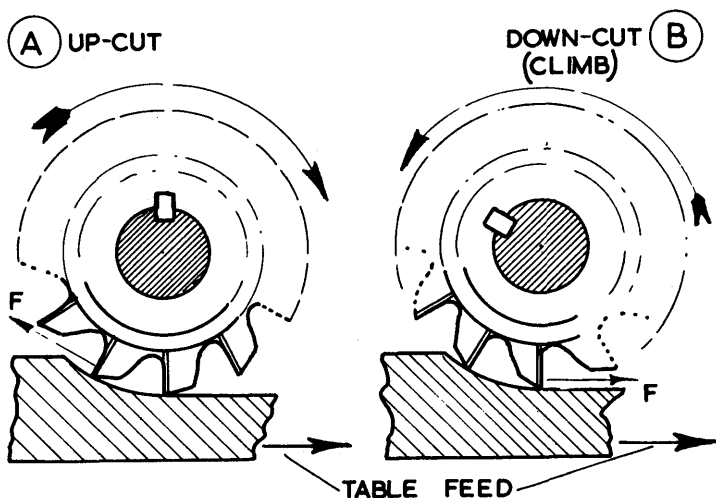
Up-cut and Down-cut Milling Technique.
